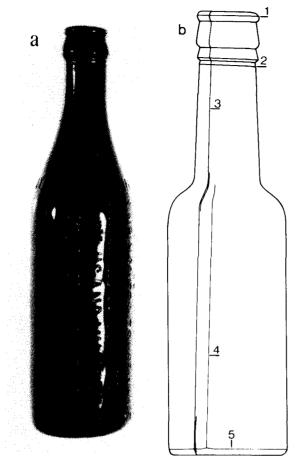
Two bottles showing typical machine-produced mould seams, including, on (b), a "ghost" seam from the parison mould on the body.
